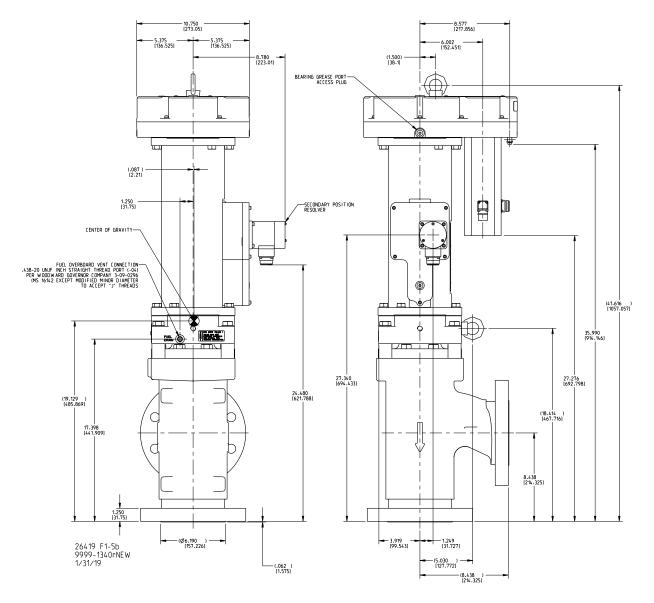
Outline Drawing (4-Inch LESV Class 300)
